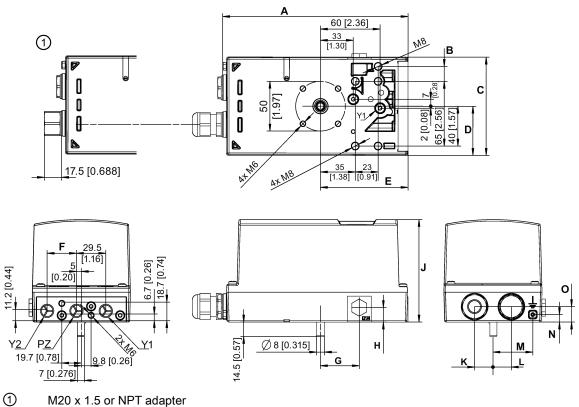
Dimension drawing, dimensions in mm (inch)
